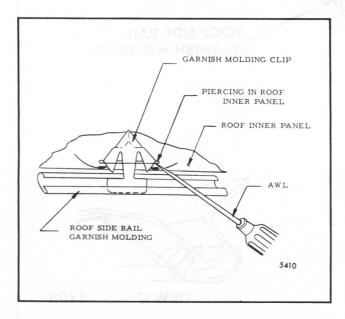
Roof Side Rail Garnish Molding Attachment - "B-C-E" Styles
